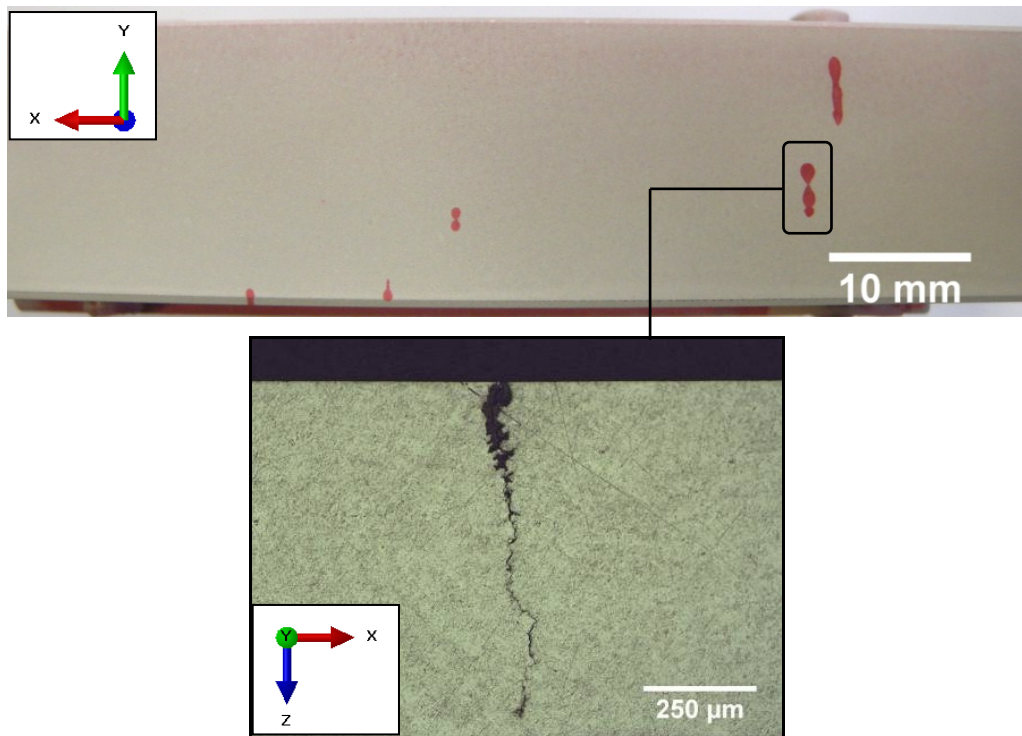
SSC cracks located on the tensile surface of fully-machined specimen P8 (Specimen tested in Produced Water at 5 °C and 69 mbar H₂S). The longest cracks are located at the inner loading roller position
